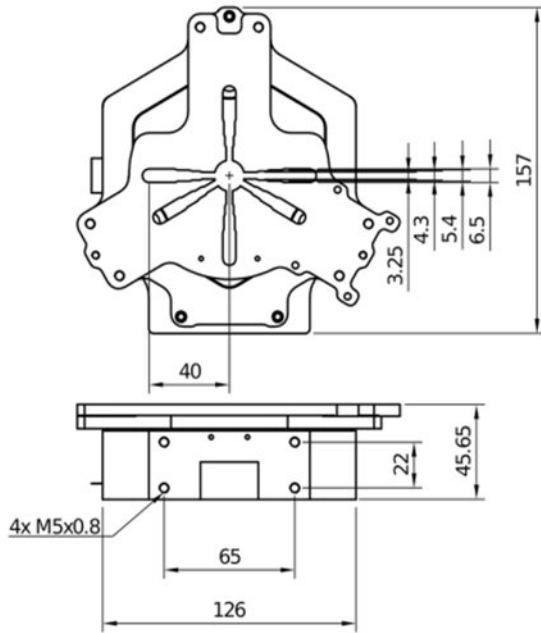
Mounting shown with 36 mm  $\varnothing$  and 53 mm length inrunner motor.
